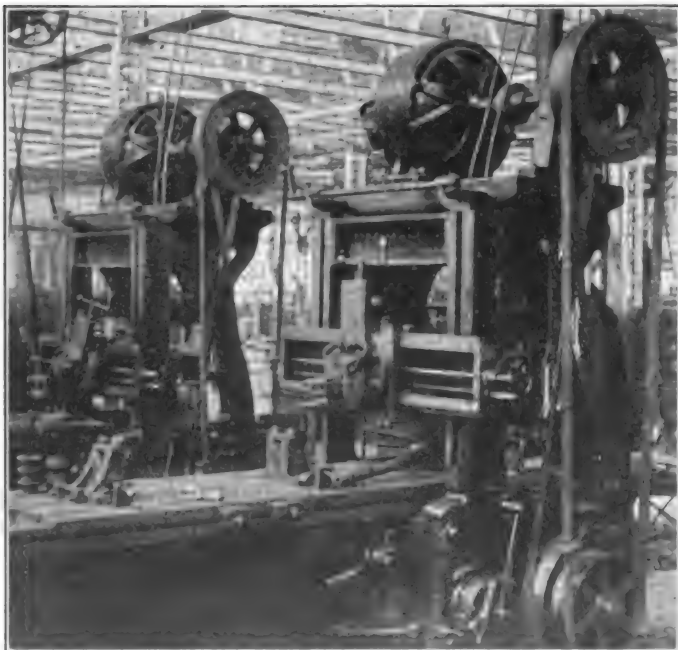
MOTOR-DRIVEN PLANERS WITH FLY-WHEELS.
